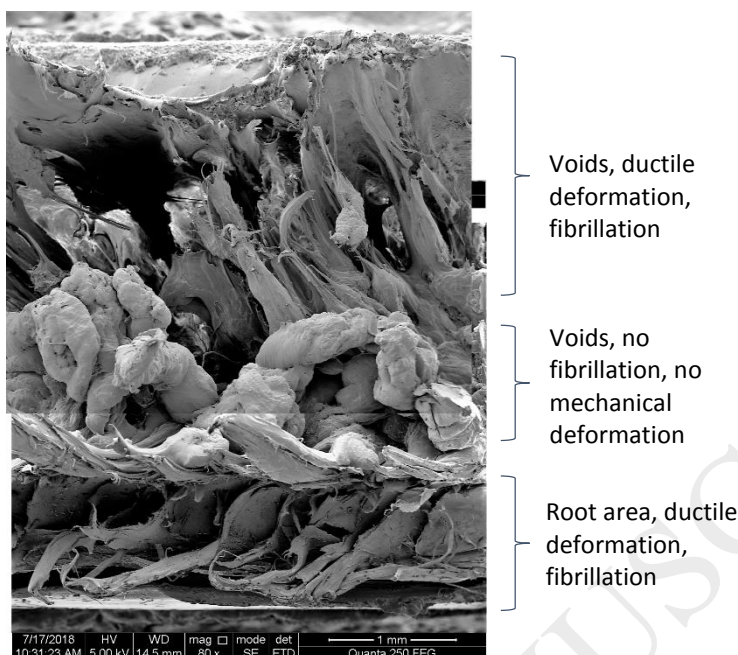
Microstructure morphology of tensile fracture surface for sample 2 (welding conditions: 1000rpm, 40mm/min, 4.2mm depth.)
